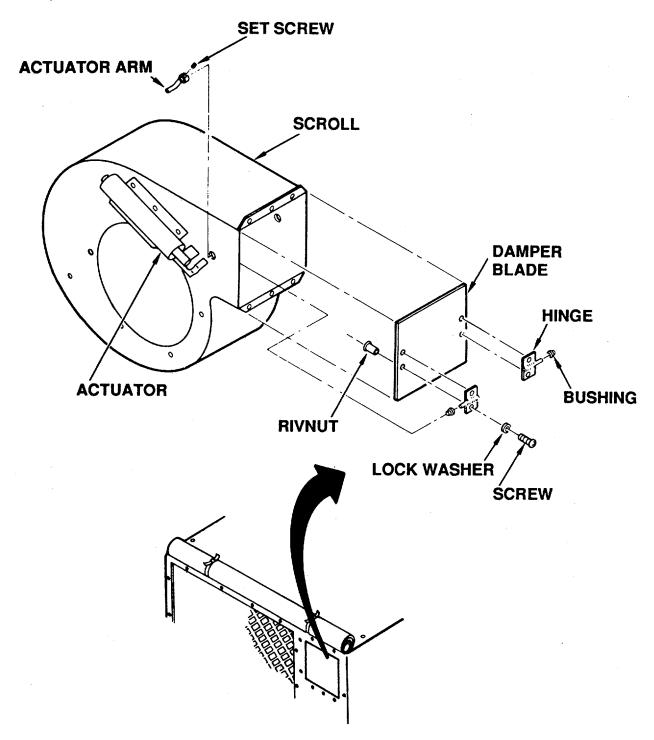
Damper Assembly Removal/Replacement 4-86
